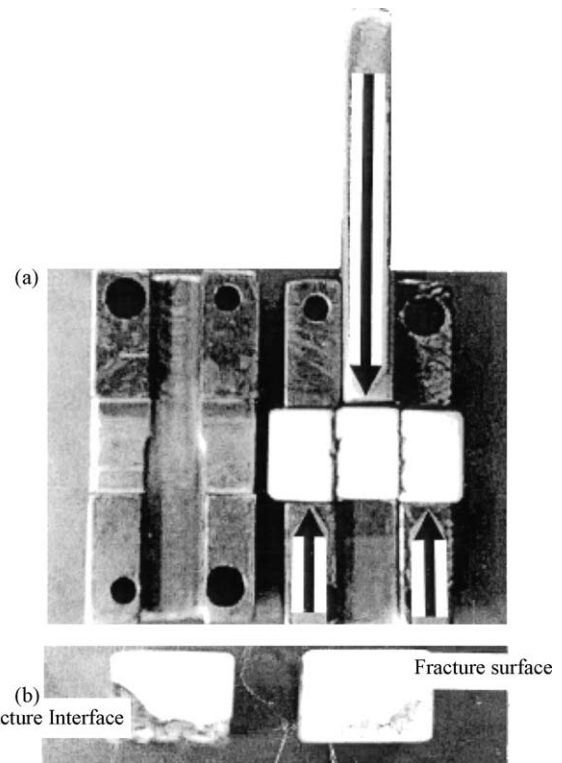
Failure mode of the CuTi joints (a) showing crack initiation and open in mode II and (b) the fractures surface in mode III.
